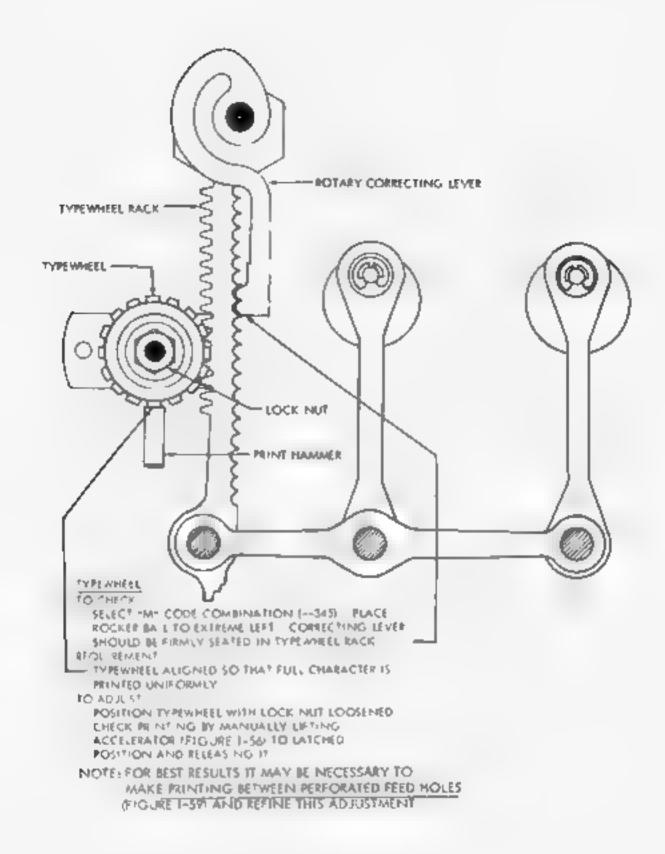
PRINTING MECHANISM FOR FULLY PERFORATED TAPE
